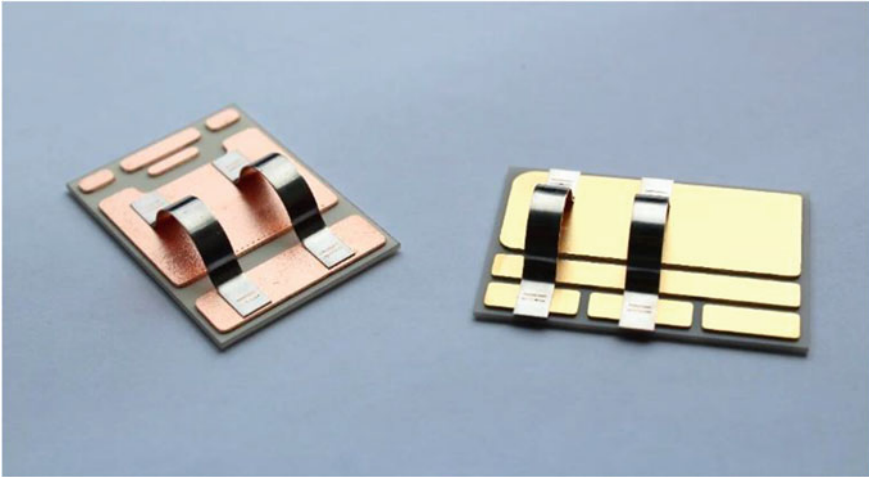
Laser welded copper and aluminum ribbons on DCB and DAB
